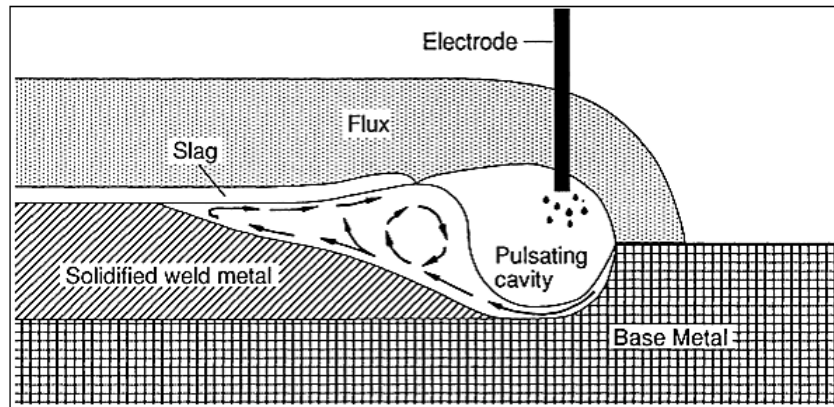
Schematic showing typical flow pattern in a submerged arc weld pool. Source: Ref [15]
